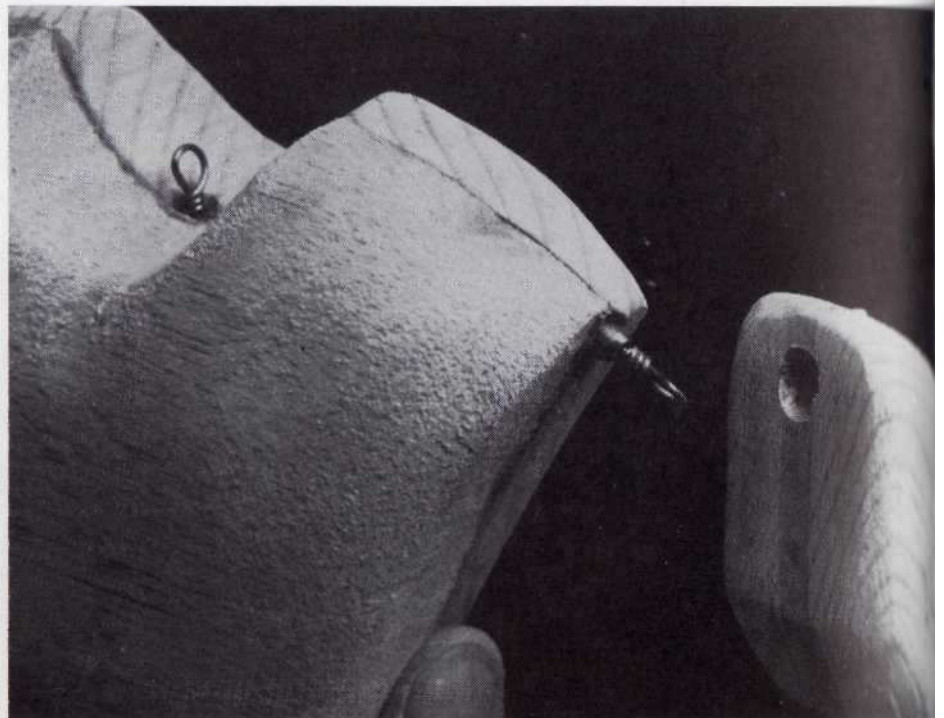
Hole is drilled in upper arm for attaching to shoulder swivel
